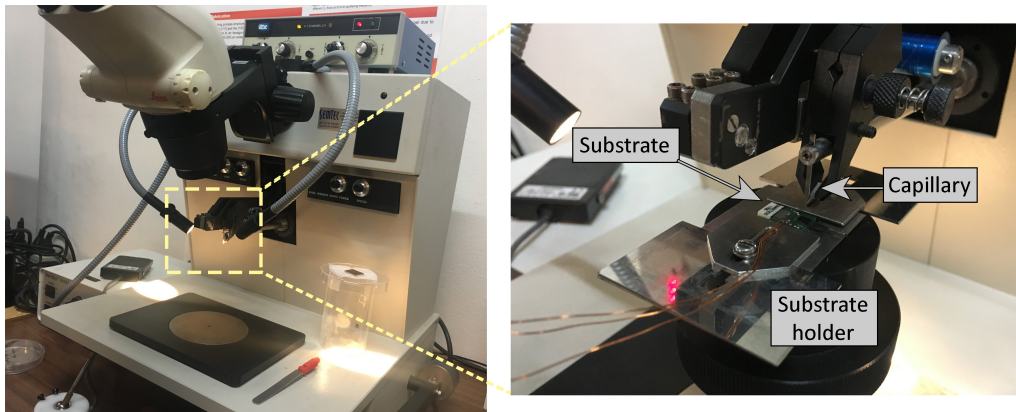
Wirebonding machine used for the optrode fabrication process.
